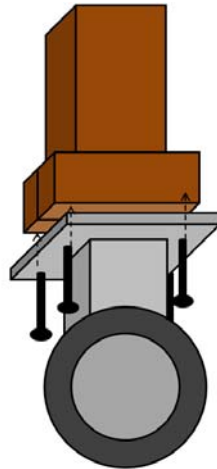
Lag bolts attach caster to adapter wood at the bottom of the leg
